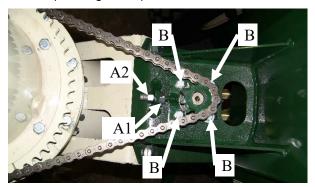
Hydraulic Swing Adjustment (Shields Removed for Clarity).
